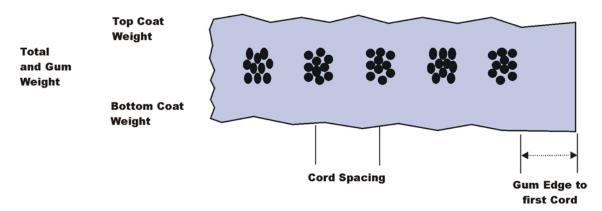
Wire Cord Measurements - Cross Section from Machine Direction
